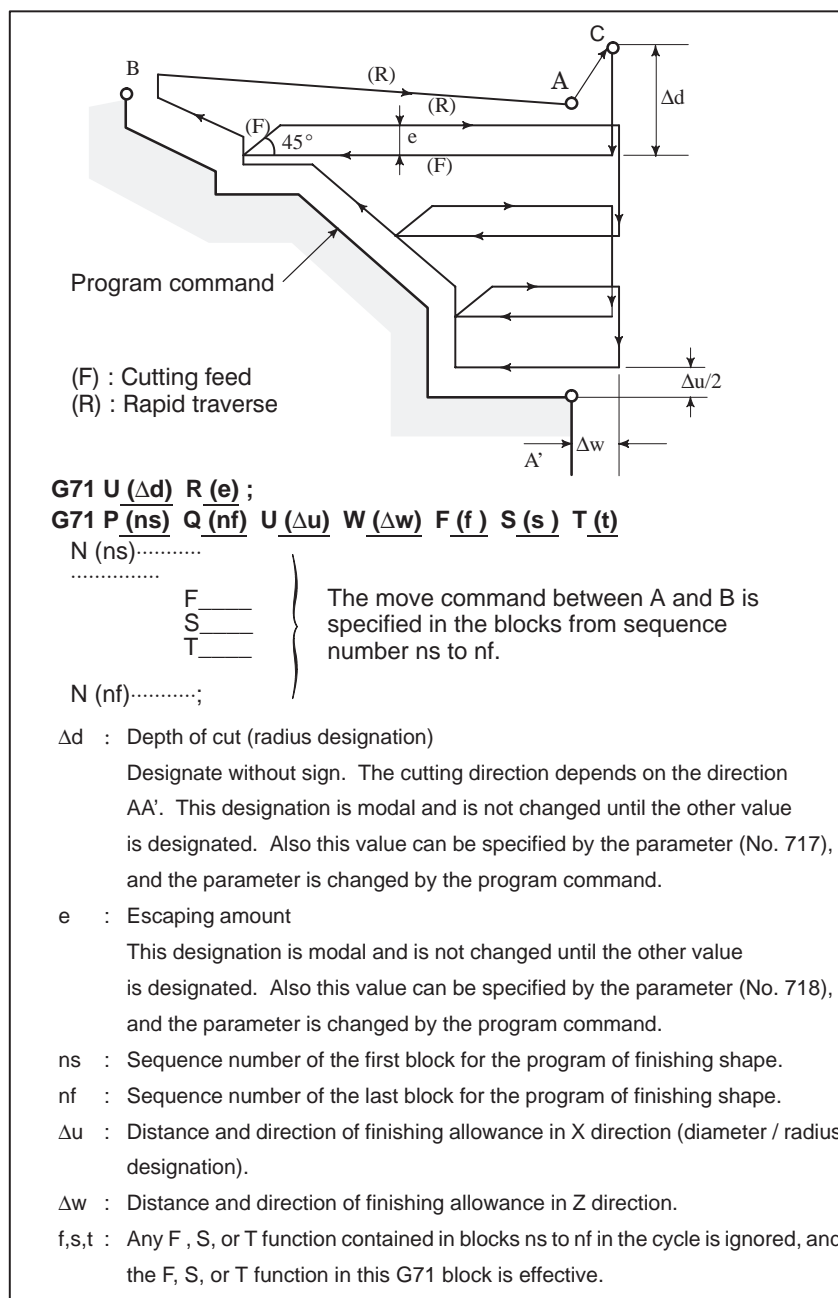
(a) Cutting Path in Stock Removal in Turning (Type I)
